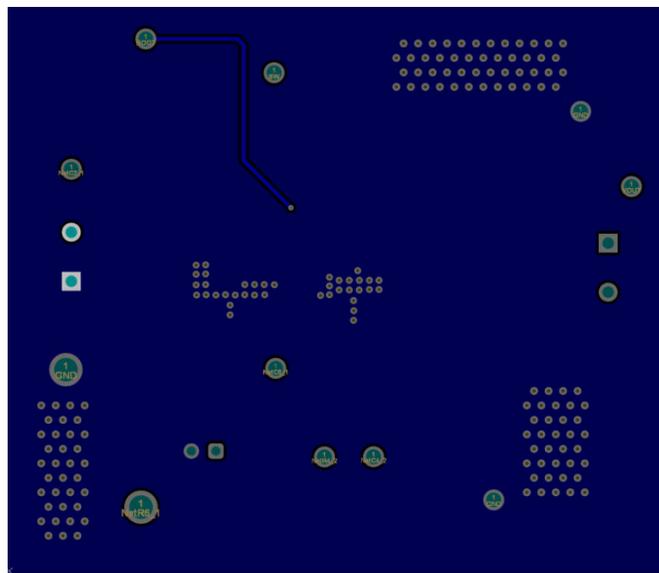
Bottom Layer and Bottom Overlay (Bottom View)
